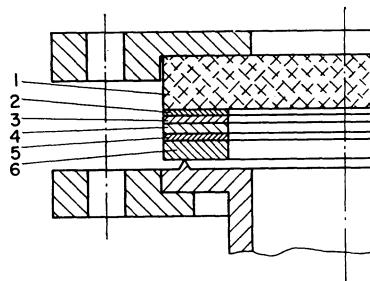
Window sealed with knife edge seal and sealing metal coatings. After Higat Berger⁵⁵⁹ (*Courtesy of The American Institute of Physics*)
